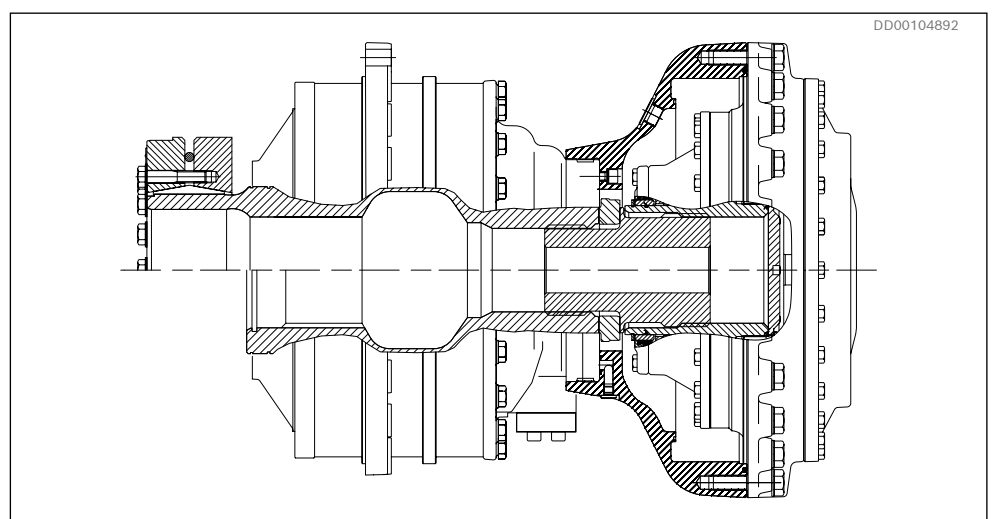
Example of tandem mounted CA motor and MDA 14 or MDA 21
